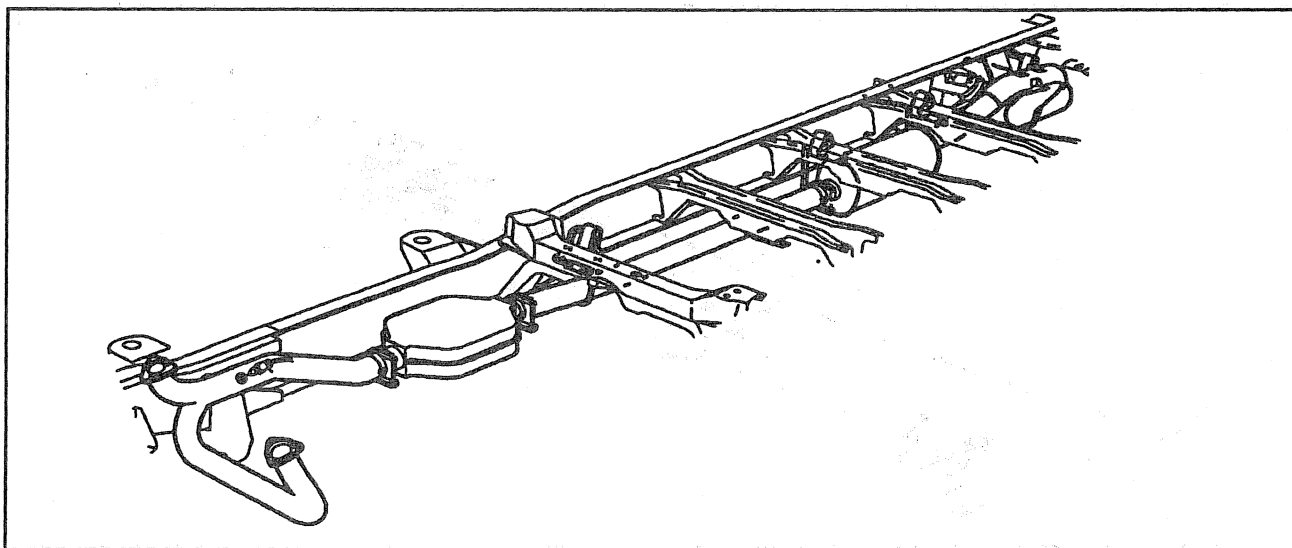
Exhaust System - C 3 Cab Chassis (3500 HD w/L05)
